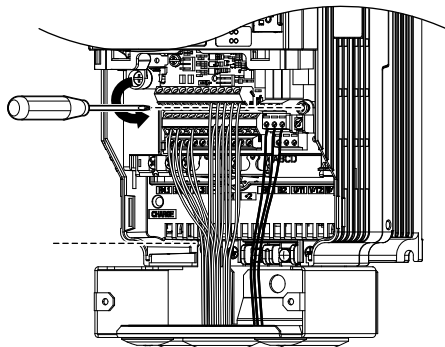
Unscrew the Terminal Board and Remove the Bottom Cover
